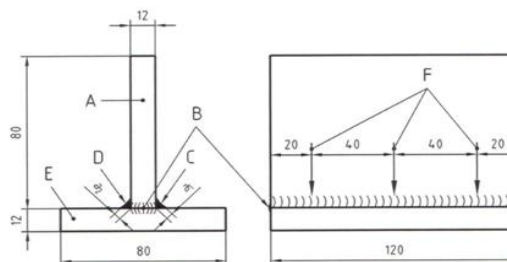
Used test piece, modification A: test piece shape and dimensions (EN ISO 17641-2 2005)
